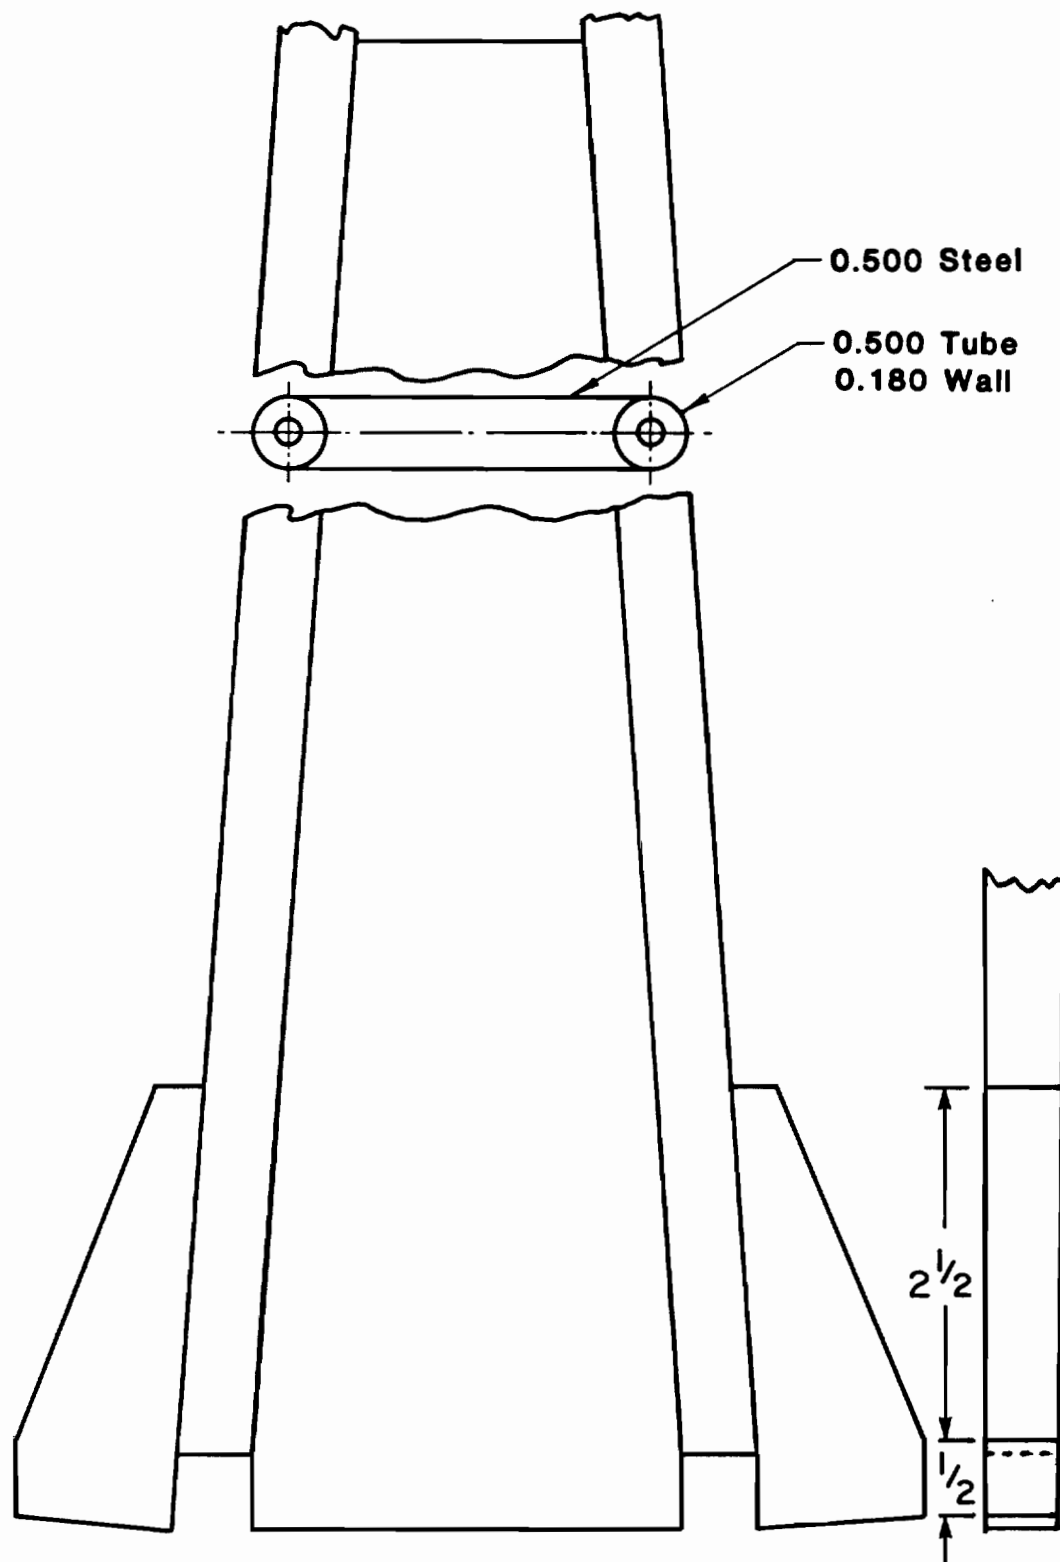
UNIFORM 1/2 INCH THICK GUIDE TUBE DESIGN.
